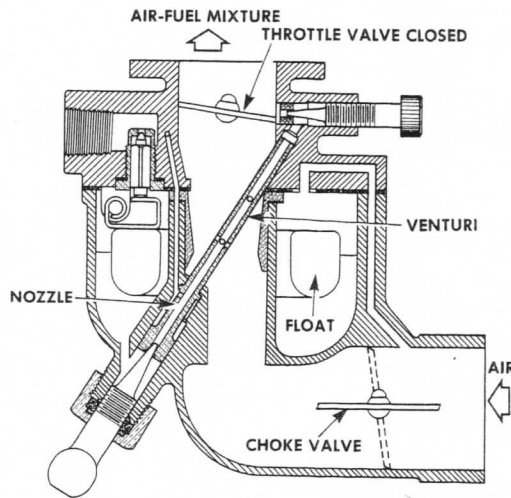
Fuel comes out of a hole behind the closed throttle valve.
